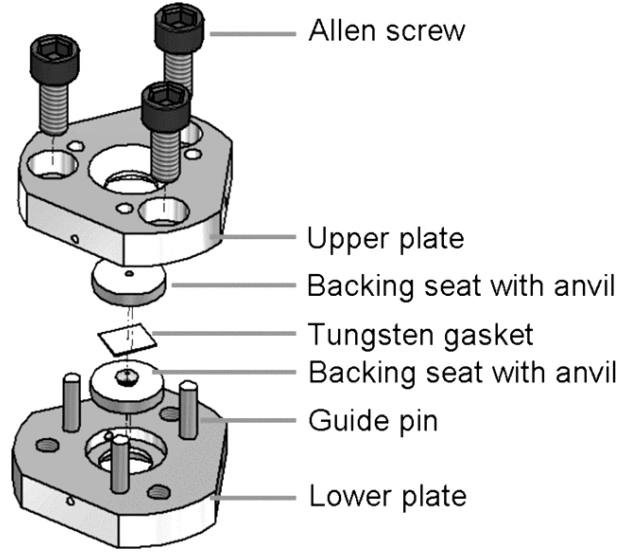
Exploded view of a Merrill-Basset DAC [Moggach et al., 2008].
